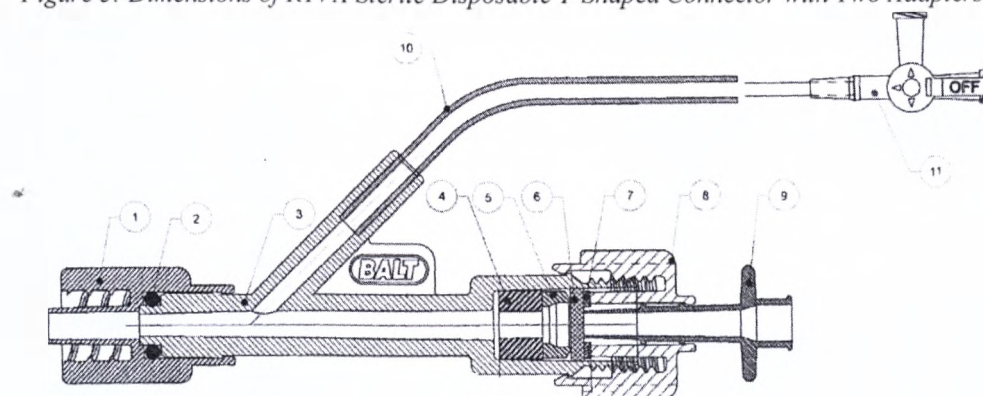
Device structure: RYVA Sterile Disposable Y-Shaped Connector with Two Adapters (1. Rotating male Luer lock; 2. O-ring; 3. Shaft; 4. Retainer; 5. Molded retainer clamp; 6. Valve; 7. Molded ring; 8. Valve clamp; 9. Valve gasket; 10. Tube (Ø 0.1x3.0); 11. Three-way stopcock).
